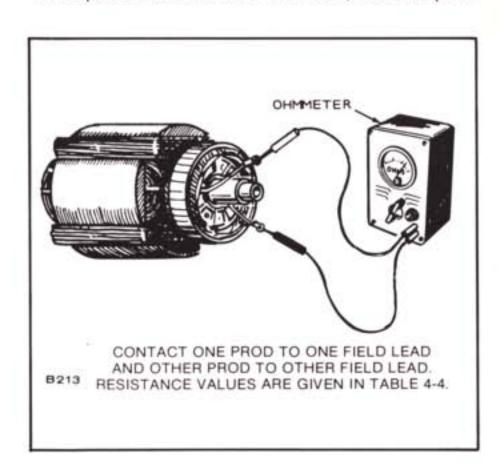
TESTING ROTOR FOR AN OPEN CIRCUIT
